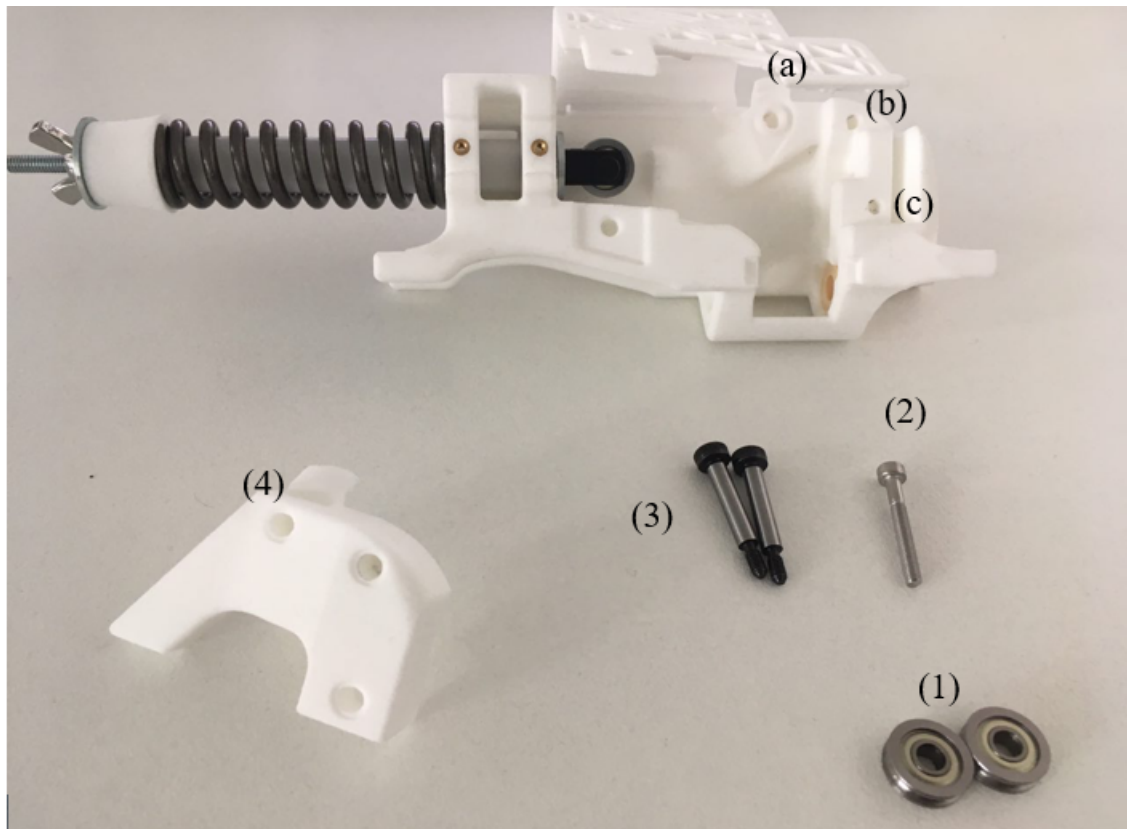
Placement of guiding pulleys in muscle housing.
